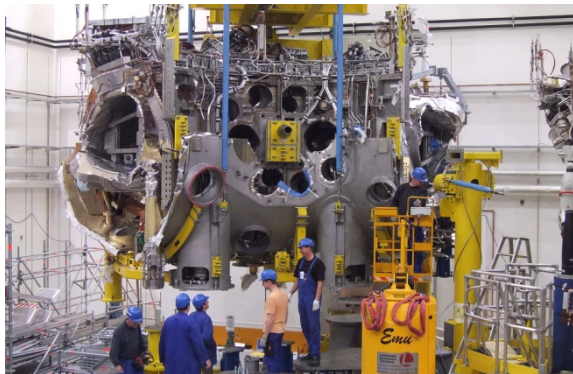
An assembled magnet module in the lower cryostat shell on the way to its final position.
